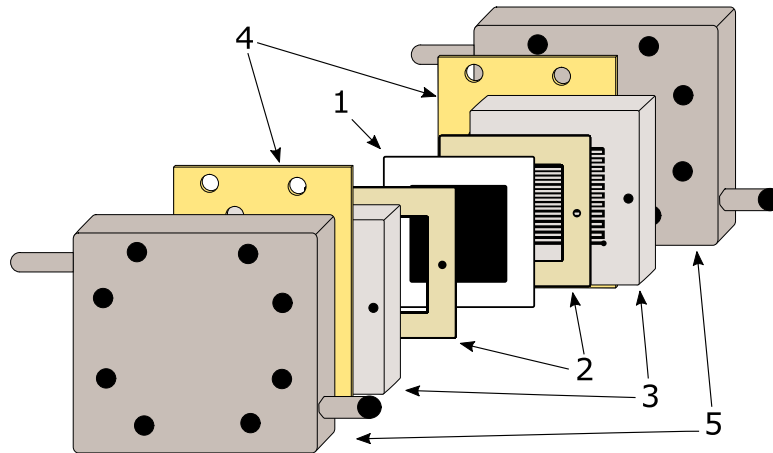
PEM fuel cell assembly: 1. - membrane electrodes assembly; 2. - gaskets; 3. - bipolar plates with gas transport channels; 4. - current collector plates; 5 - anode and cathode end plates.
